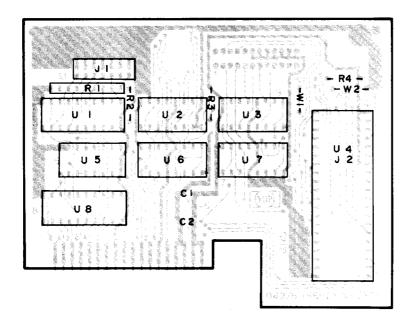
A21 HP-IB Board Assembly Component Locations.
